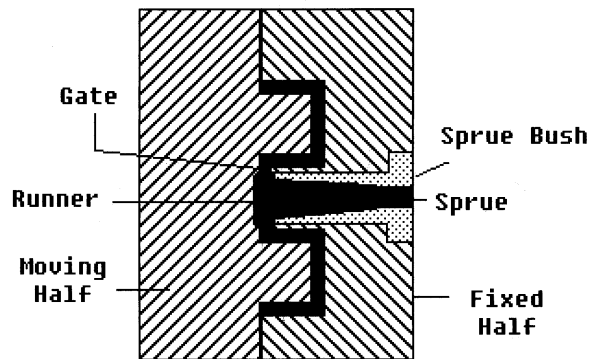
Two-plate mold showing sprue, gate, and runner system.
